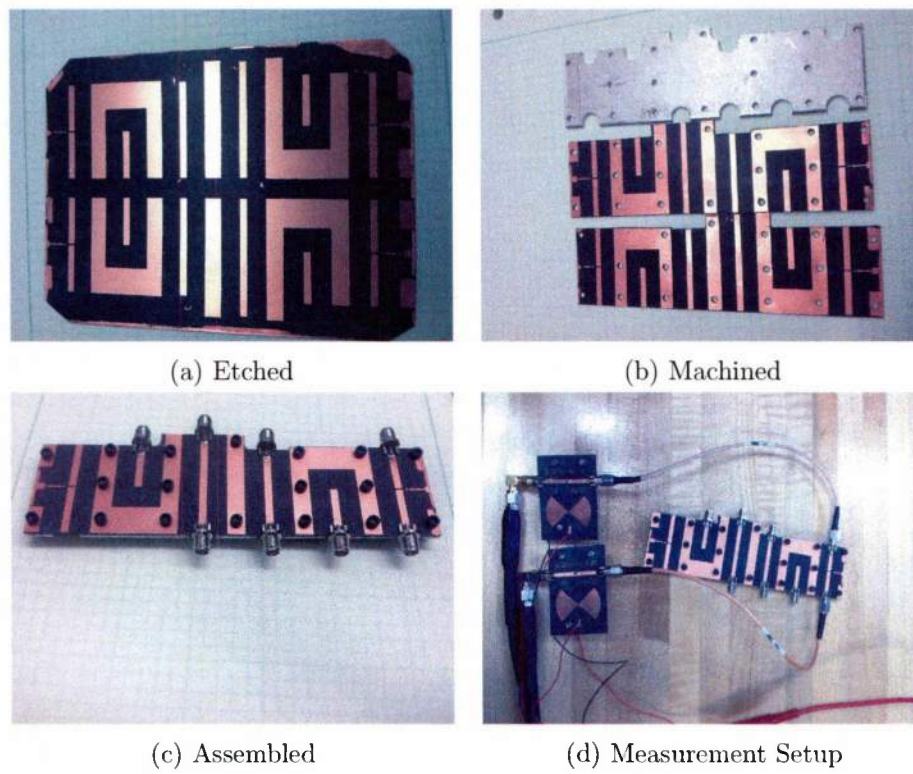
Photographs of the microstrip test fixture fabrication and use.
